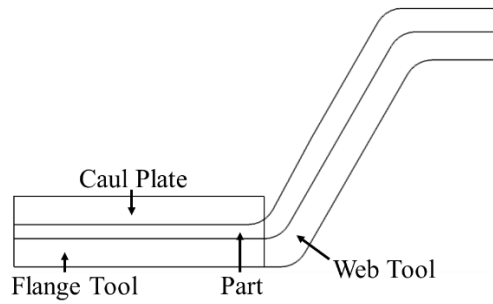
Convex geometry with the flange tool thickness split above and below the part.
